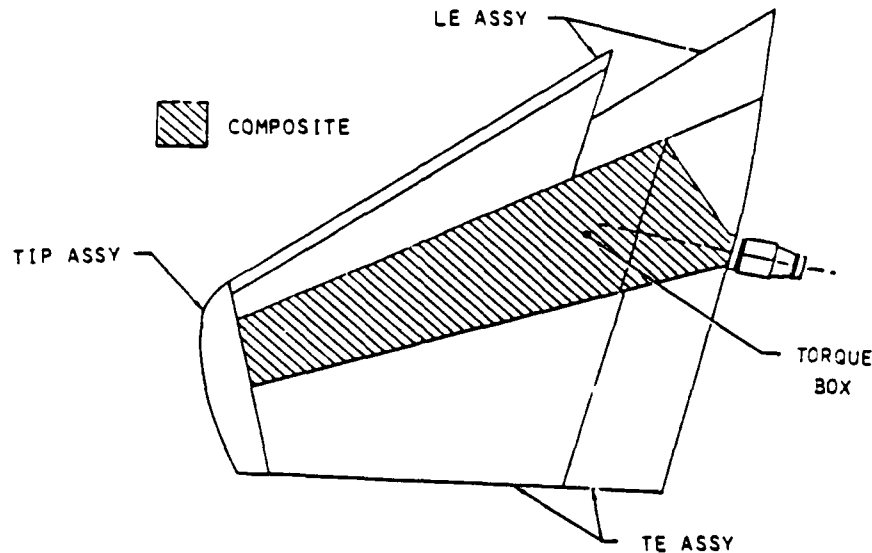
Plan view of the F-15 horizontal stabilizer.
